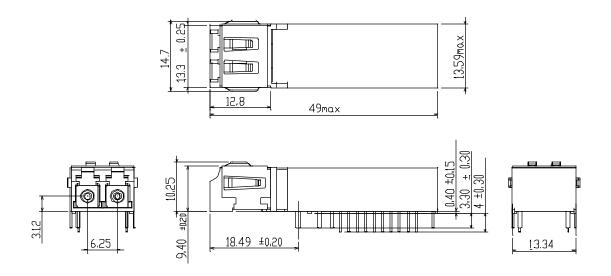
Outline Dimensions (SCM6008-GL-CN)
